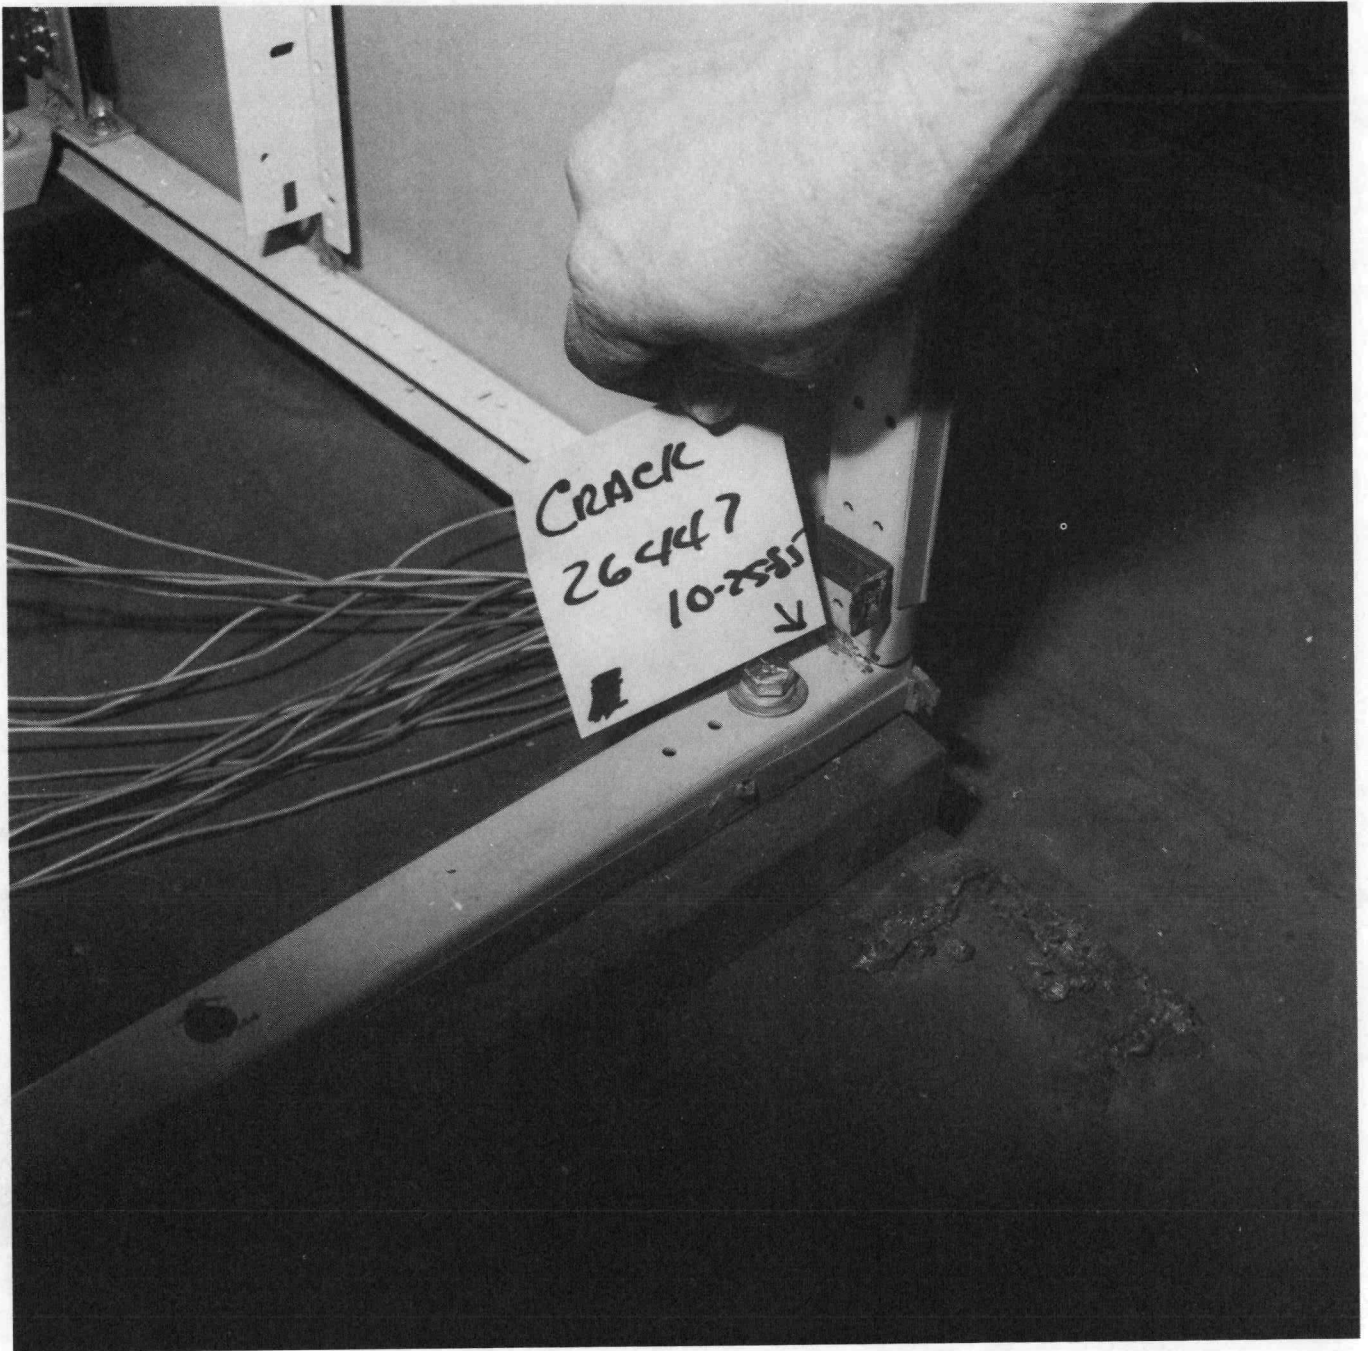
Details of cracked welds following Run 29 (1.6g table ZPA).
